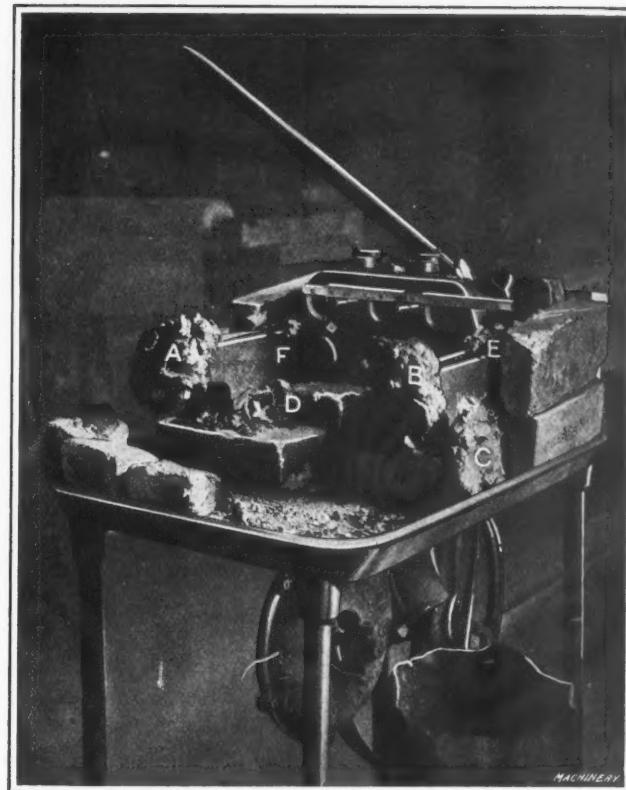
Pump Body showing Method of saving Babbitted Bearings
